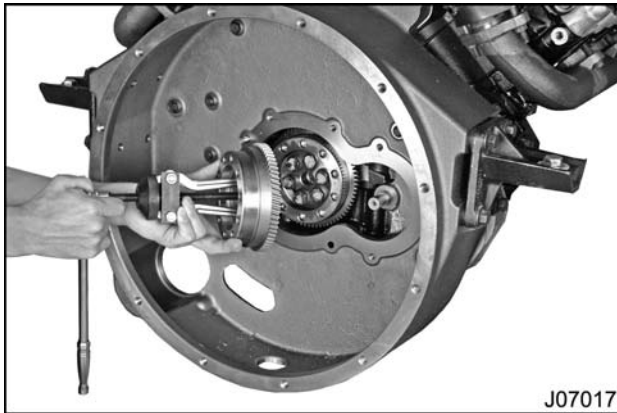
Crankshaft secondary flange removed (stripped chassis)
